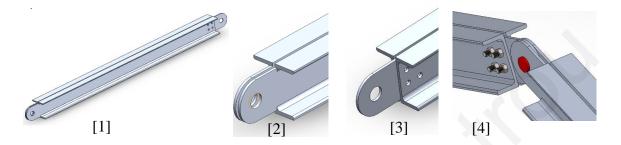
[1] Complete beams with plates, [2] Double plates at one end of the link, [3] Single plate at other end of the link, [4] Assembly between the beams with bolts/nuts and pins
